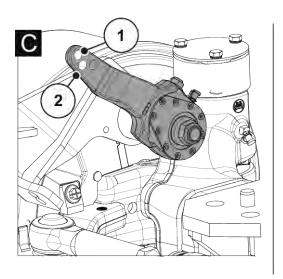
Position of the brake lever/brake cylinder connection – steering axle
